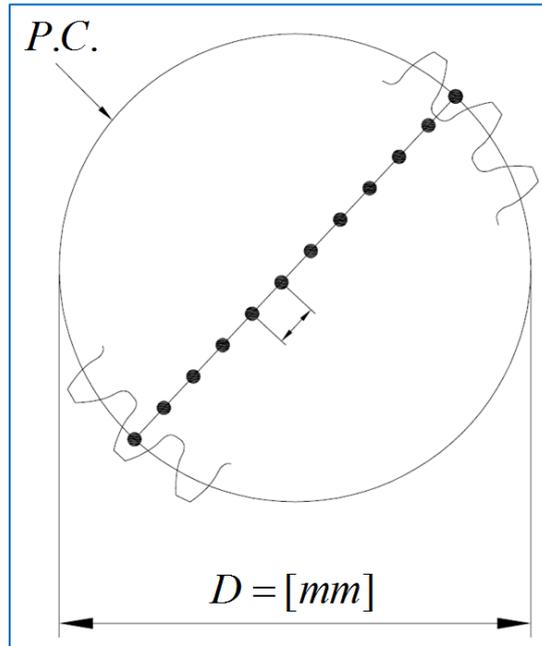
Size judgement of gear tooth(Judged by circular pitch)
